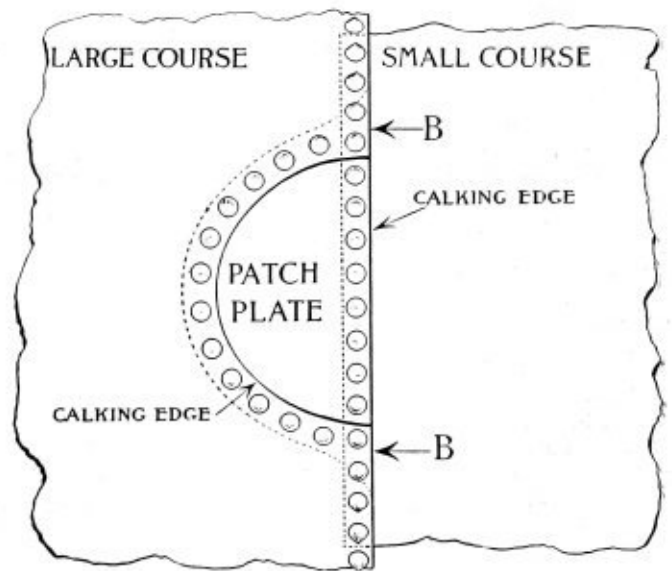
Showing a hard patch applied to outside course of horizontal boiler
